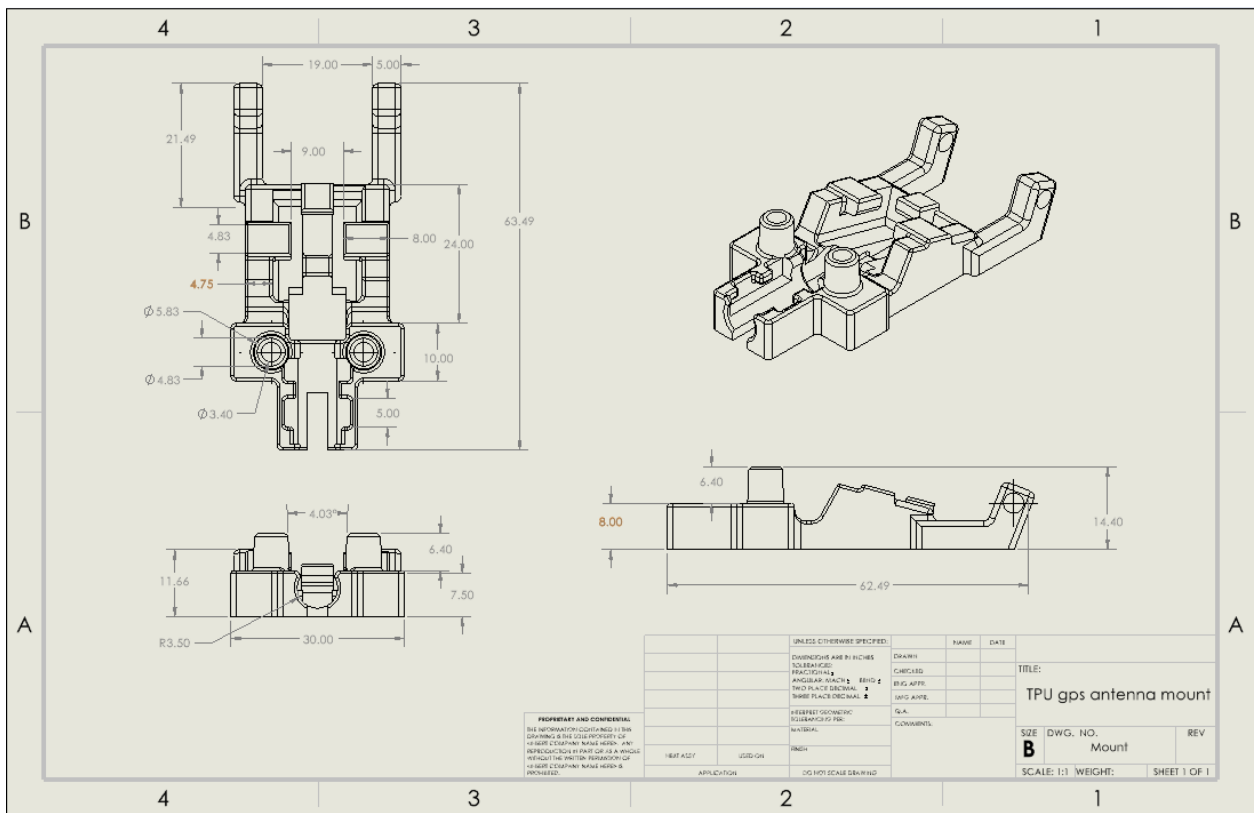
The CAD drawing of the GPS/ELRS antenna mount.
